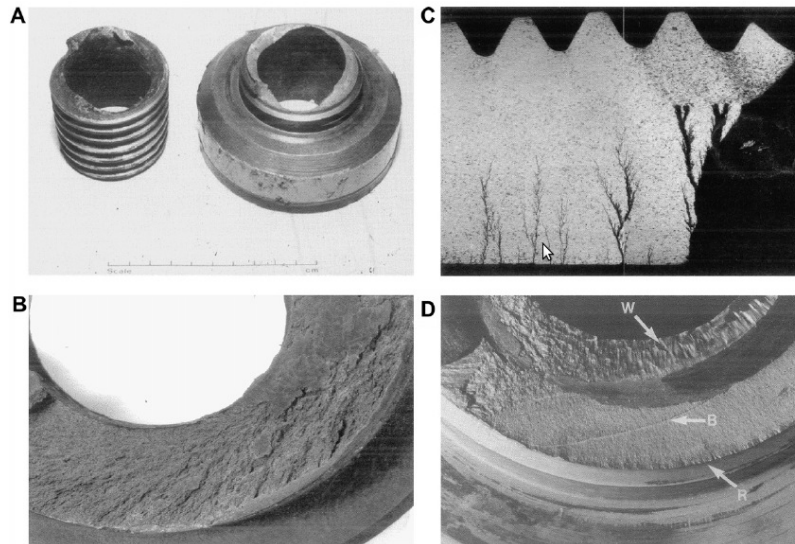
Types of failures: (A) ductile; (B) fragile; (C) stress corrosion cracking and (D) fatigue. Source: Macdonald *et al.* [22].
